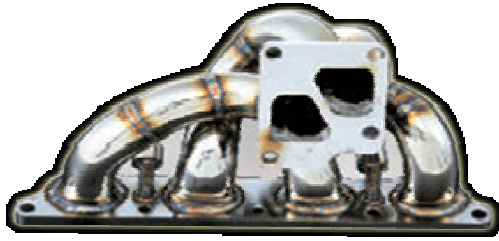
Welded tubular manifold with a divided turbine inlet design feature
